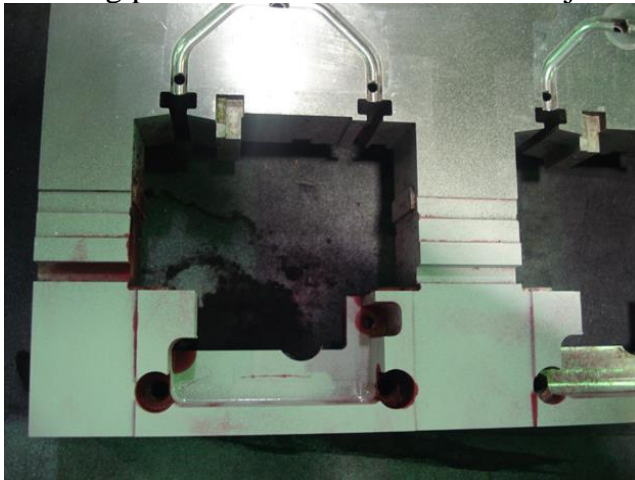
Crack in the mold (in red) localized after performing a non-destructive crack detection test BycoTest
